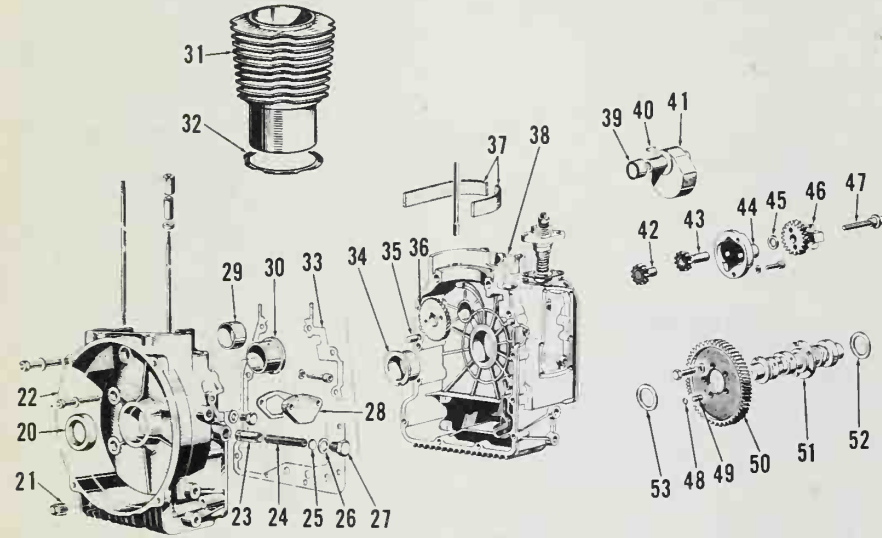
Typical exploded view of crankcase. Balancer (41) is not used on Models WD1-340, WD1-350 and WD1-430.
